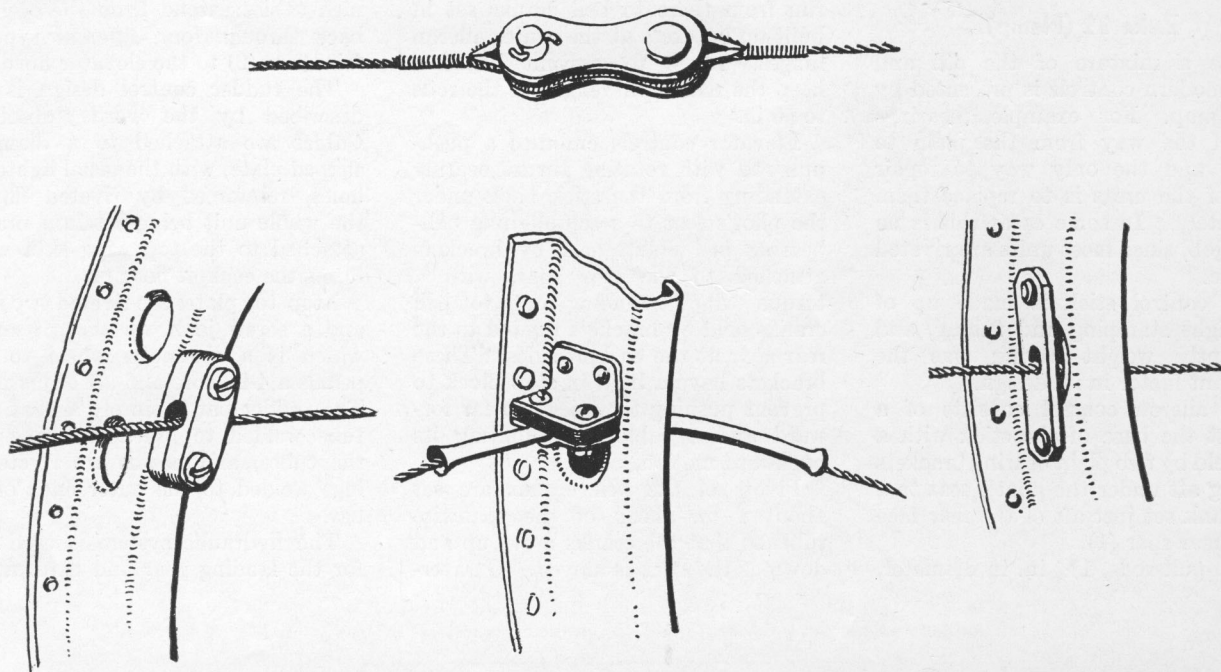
Three different types of fair-lead found in the fuselage. That at the left is made up of two fiber blocks screwed together and bolted to the former; in the center is a copper tube flared at the ends and clamped by two bolts to the fiber spacer block; that at the right is a single fiber block riveted to the former. The top sketch shows a typical cable connection found throughout the craft. It is a standard bicycle-chain repair link with drilled pins for securing a cotter pin or wire. The loops are hand-spliced around metal thimbles.
